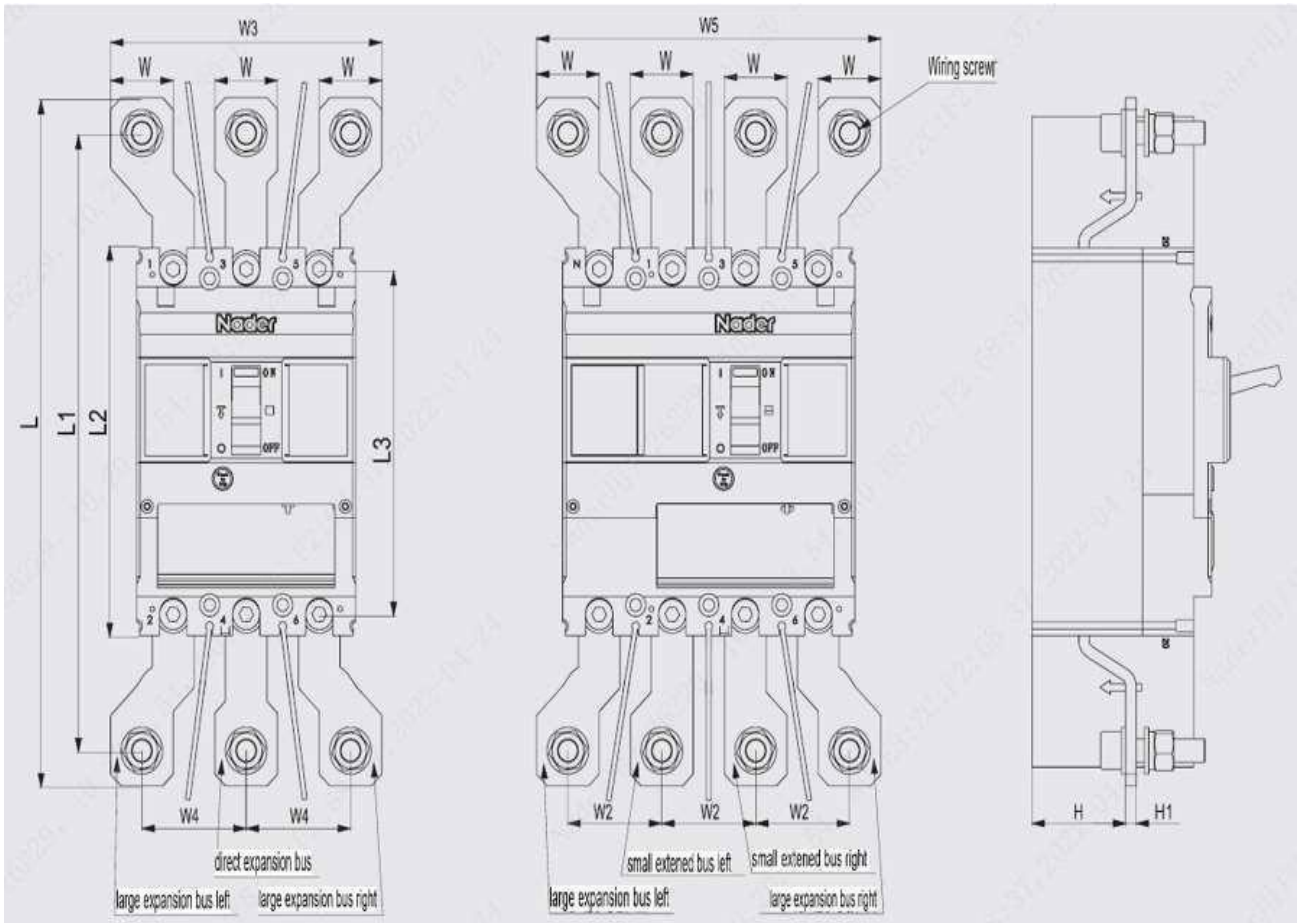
2P、3P、4P Outline and installation dimensions of expansion wiring in front of the board
